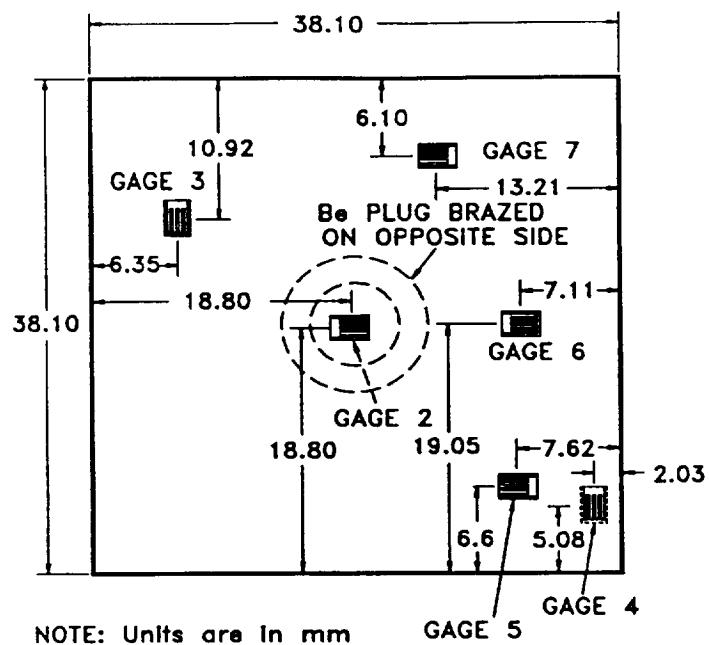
Location of Strain Gages on Plate-Plug Specimen
